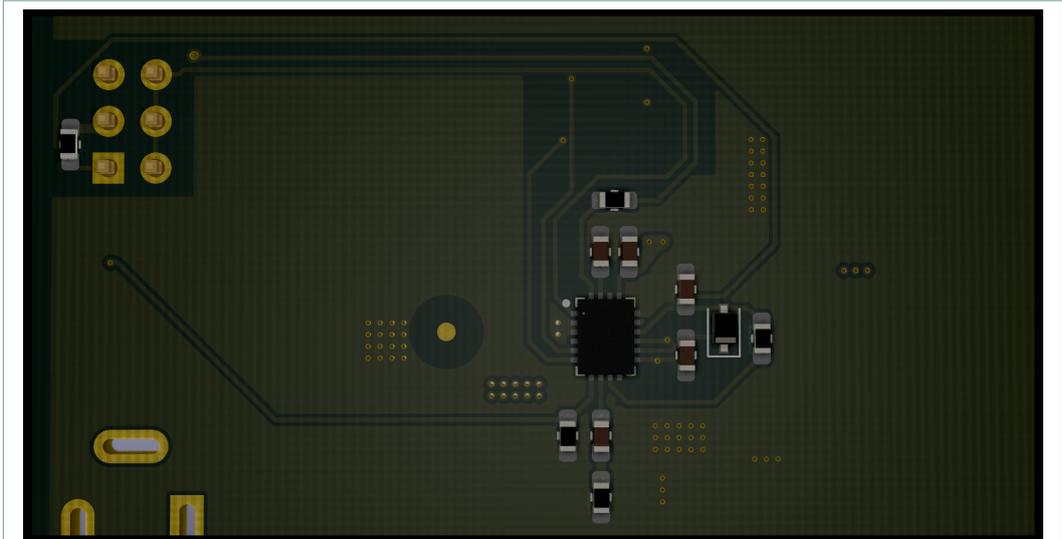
Buck converter PCB layout: bottom side detail showing controller IC
